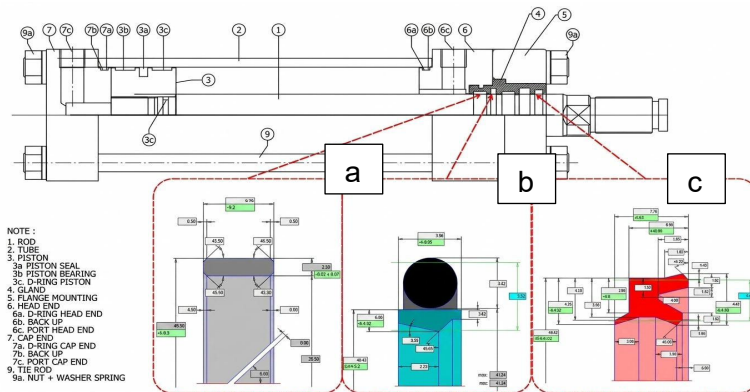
Assembly cross-section of the test hydraulic cylinder with expanded seal groove profiles.
